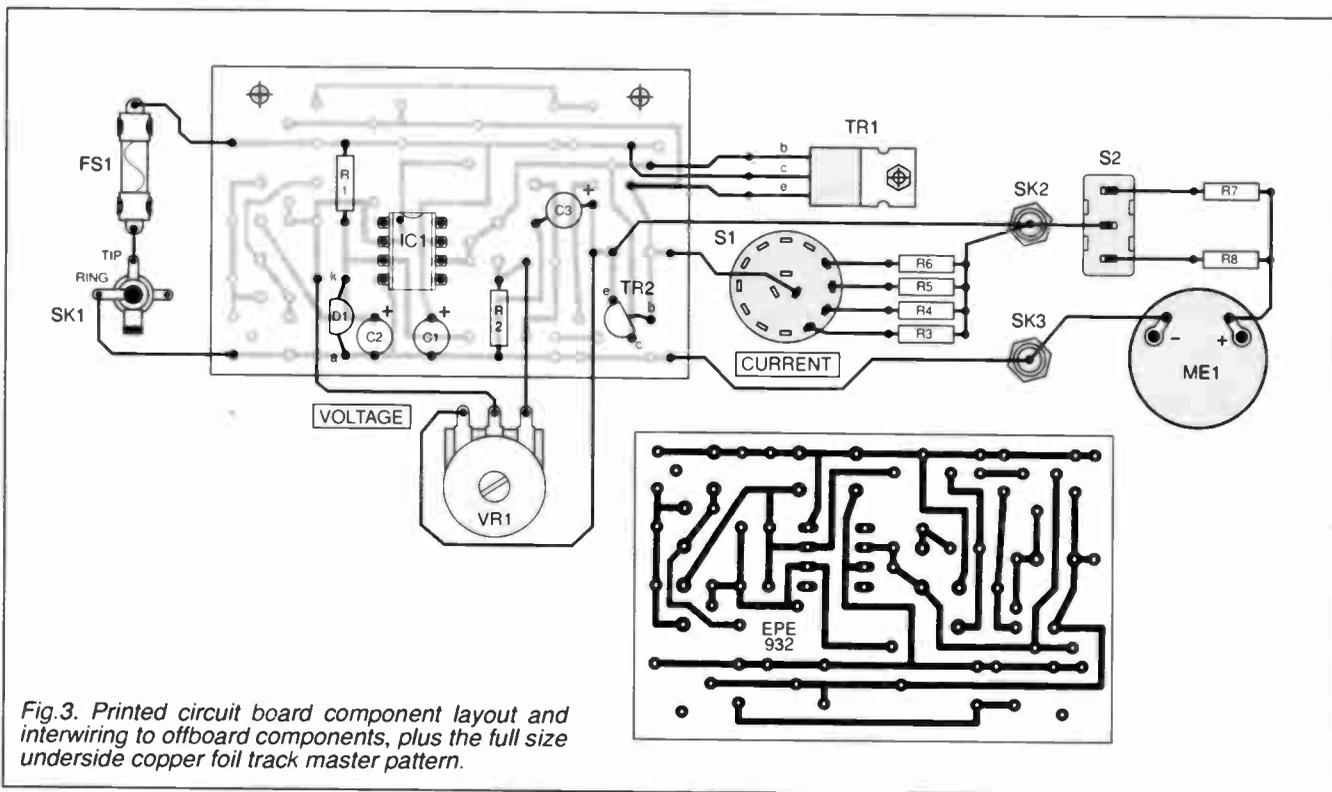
Printed circuit board component layout and interwiring to offboard components, plus the full size underside copper foil track master pattern.
